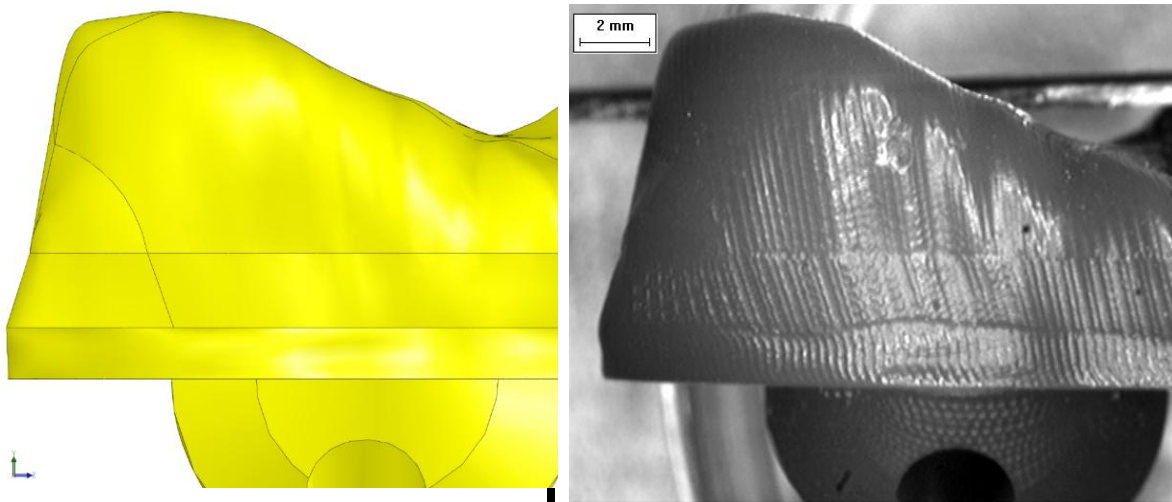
CAD and machined comparison of the back surface of the implant, where on left is the CAD model and on right is the machined substrate prototype from wax.
